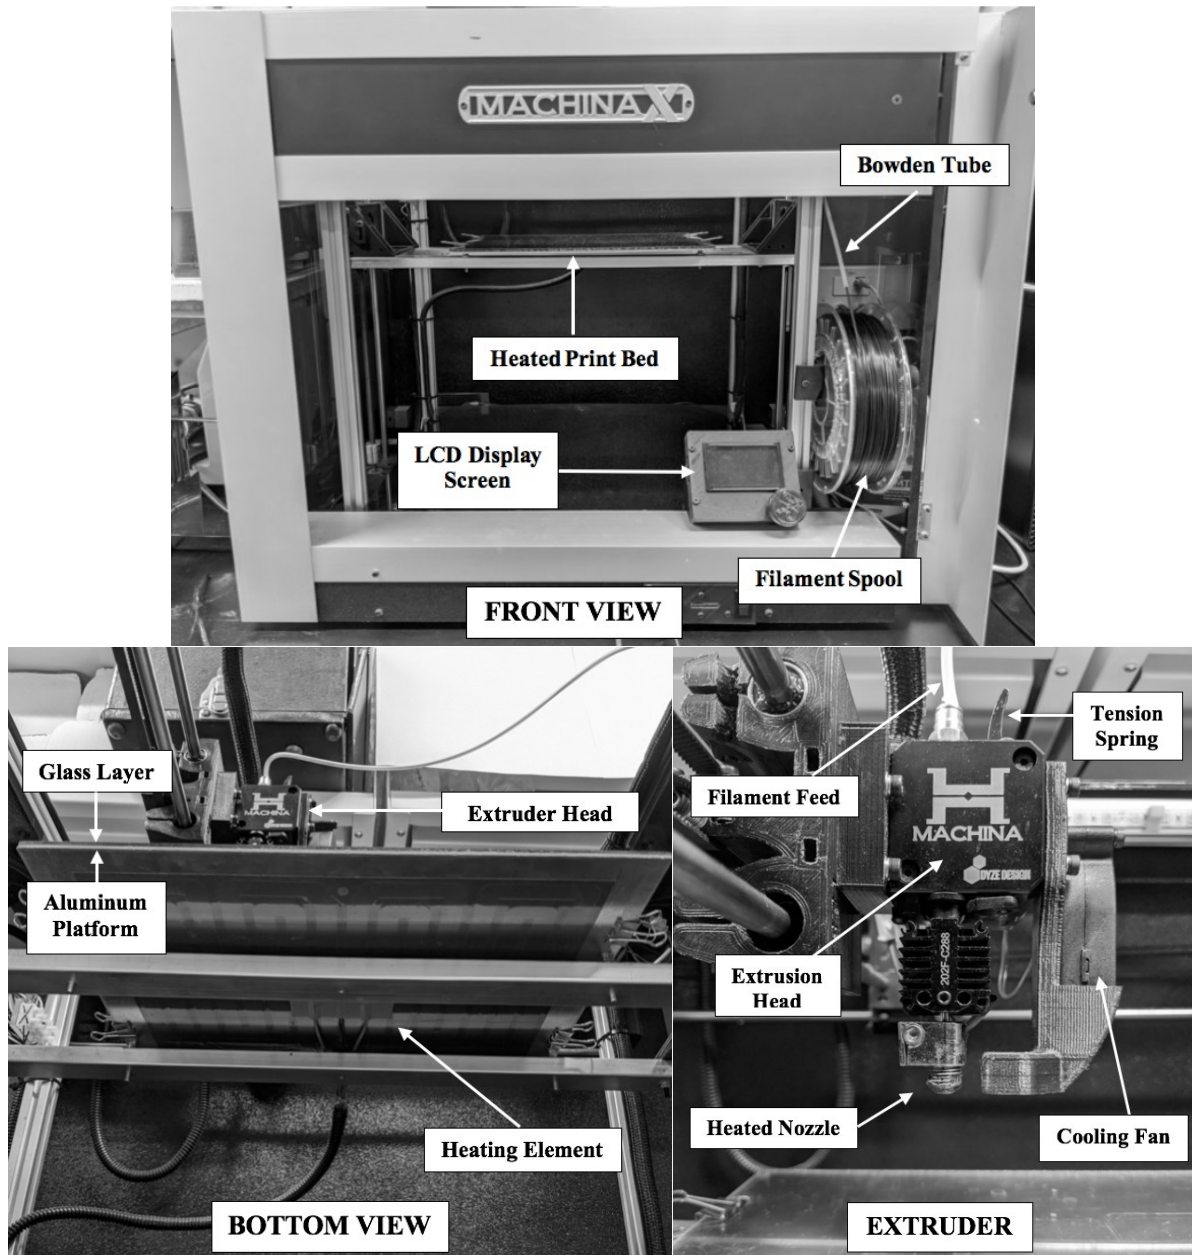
Labelled configurations of the Machina Mk2 X20 3D Printer
